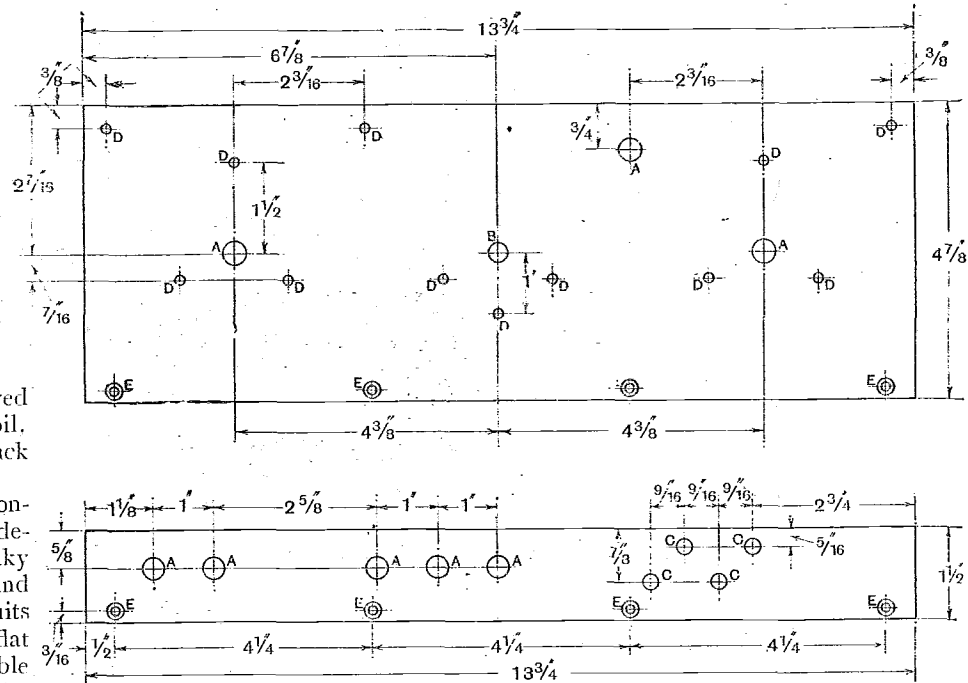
Dimensional drawing of the front panel and terminal strip made in 1/8 in. ebonite. Sizes of holes: A, 3/8 in.; B, 1/2 in.; C, 1/4 in.; D, 3/16 in.; E, 1/8 in. countersunk.
